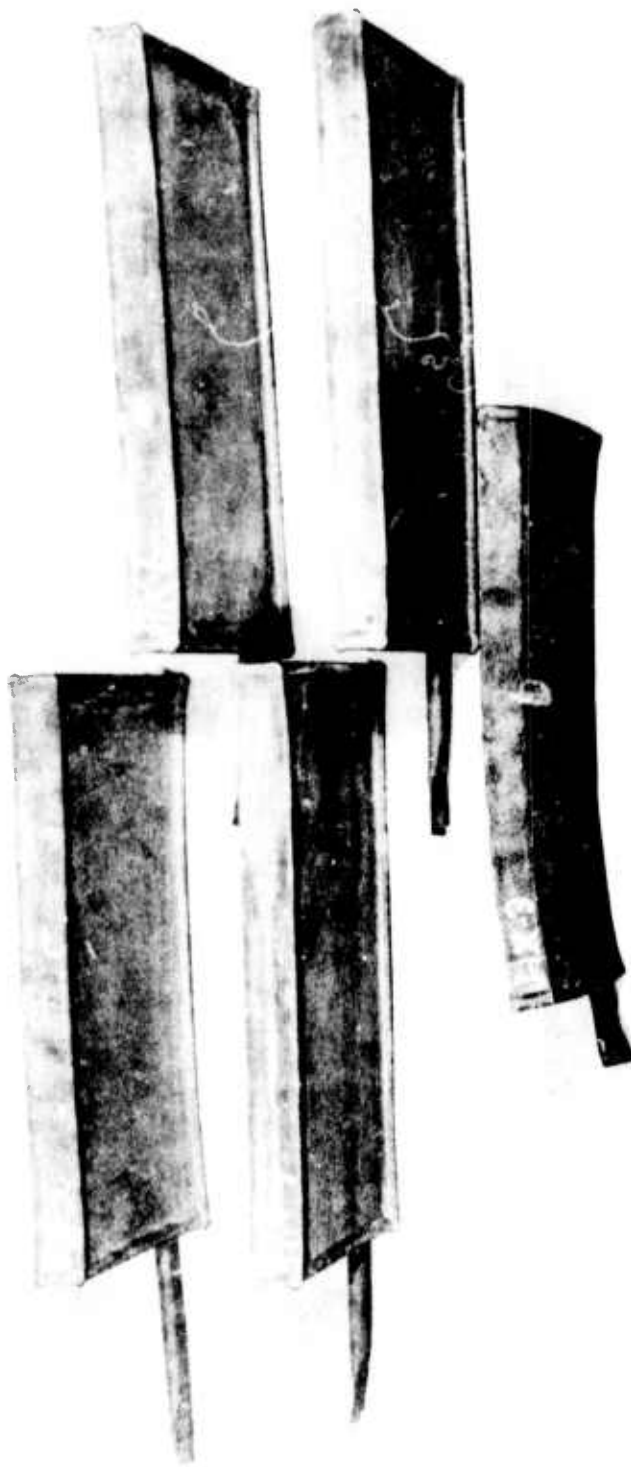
7 Photograph of Hot Isostatic Pressed (HIP) Plate samples of Inconel X750 shown as hiped before removal of AISI 304 stainless containment shells.
